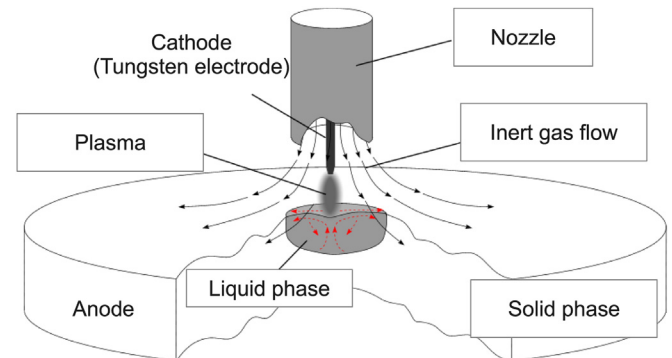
Scheme of GTA spot welding on a disk.
